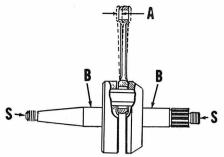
Support crankshaft in lathe centers at (S) and measure runout at (B).
